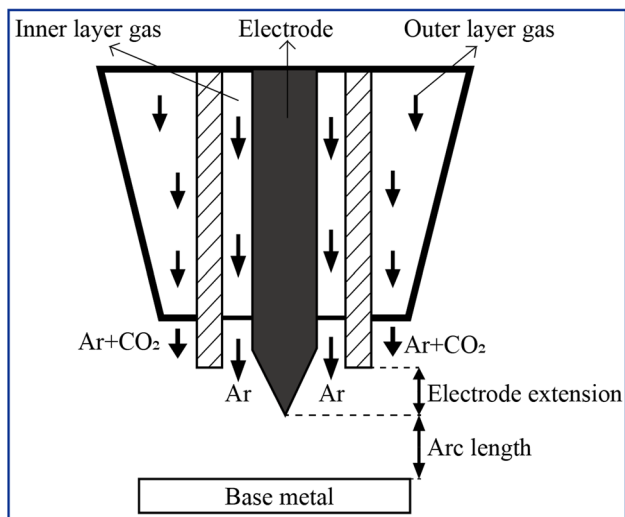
Schematic diagram of the double protective gas TIG welding process [74]
